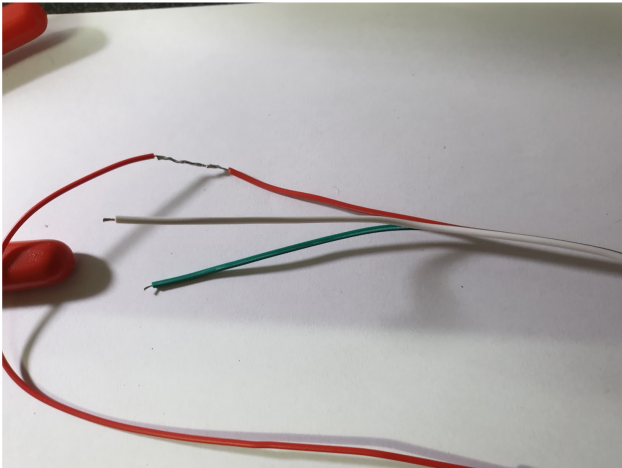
, 3. Process of soldering three jumper cables to a JST connector
